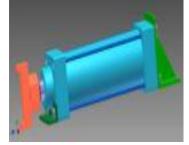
Pneumatic cylinder, Piston eye, Fixture
